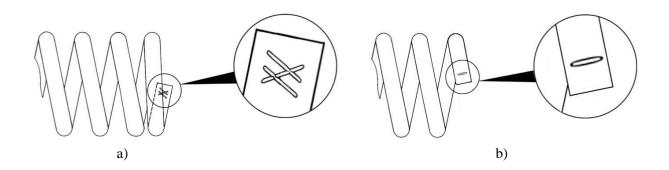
Spring group marking: a) - springs A21R23-2902712; b) - springs A32R32-2902712
